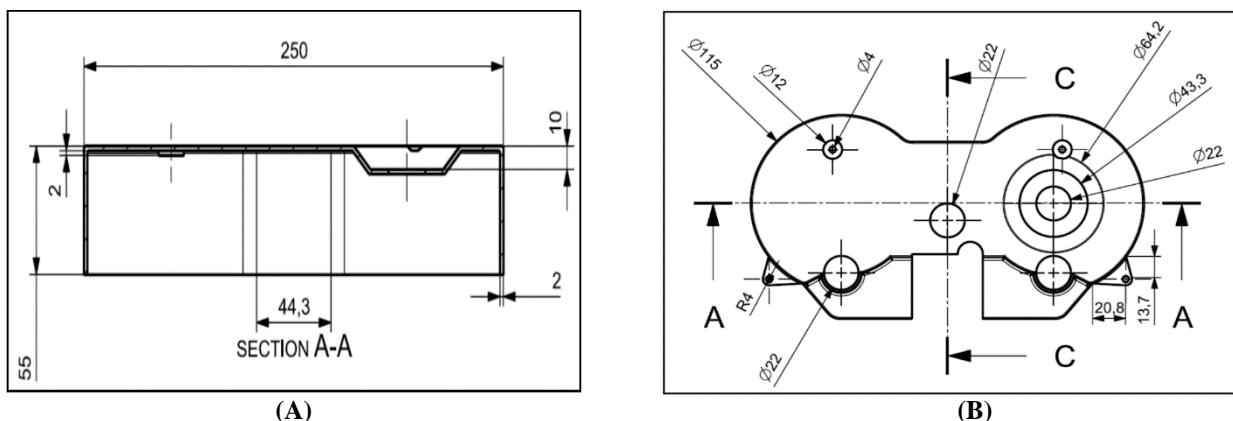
CAD Model Drafting (A) Front View (B) Top View
